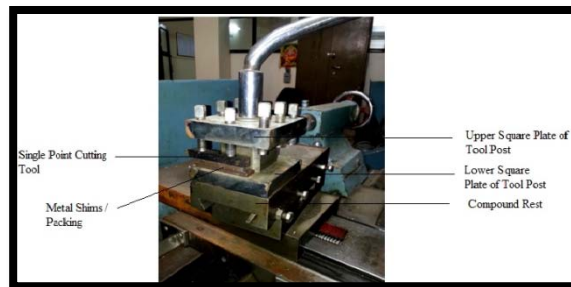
Tool post with cutting tool supported and lifted through metal shims
